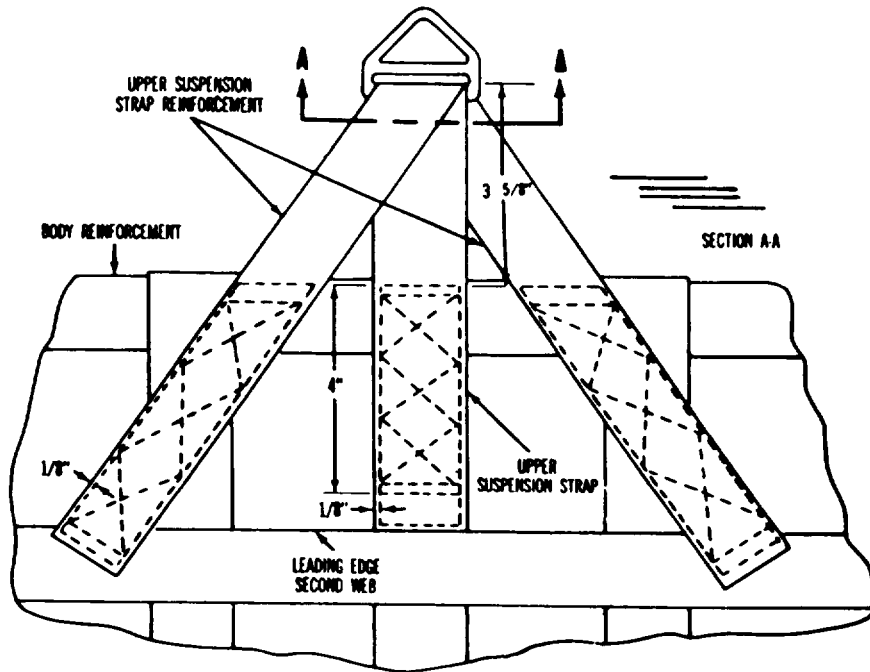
Replacement details, upper suspension strap and reinforcement.
